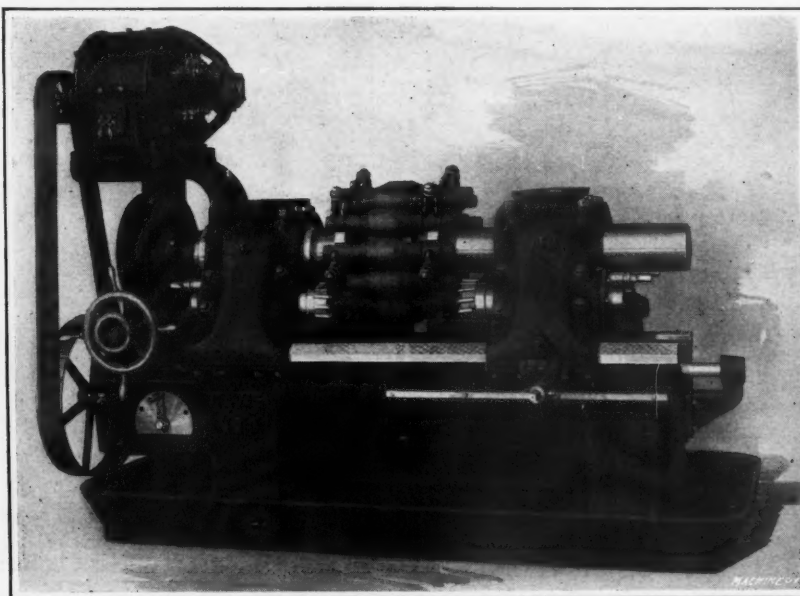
Davis No. 1 Continuous Duplex Four-spindle Milling Machine for Automobile Camshafts, Crankshafts, etc.
